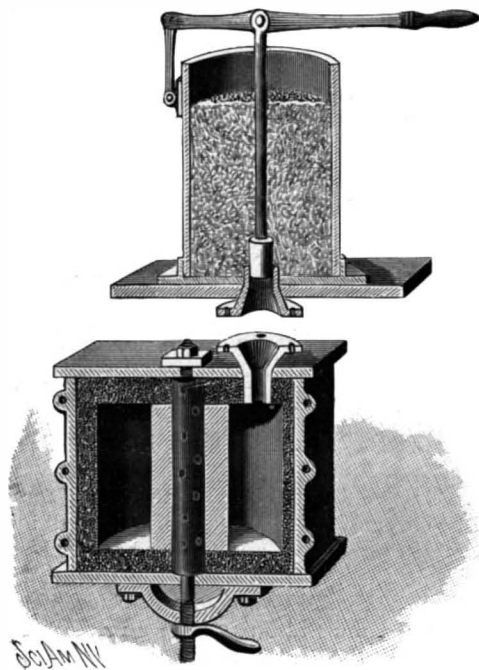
SECTION OF MOULD AND MOULD FILLER.
